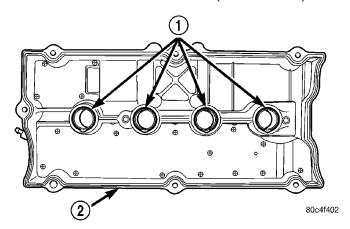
Cylinder Head Cover Gasket and Spark Plug Well Seals
